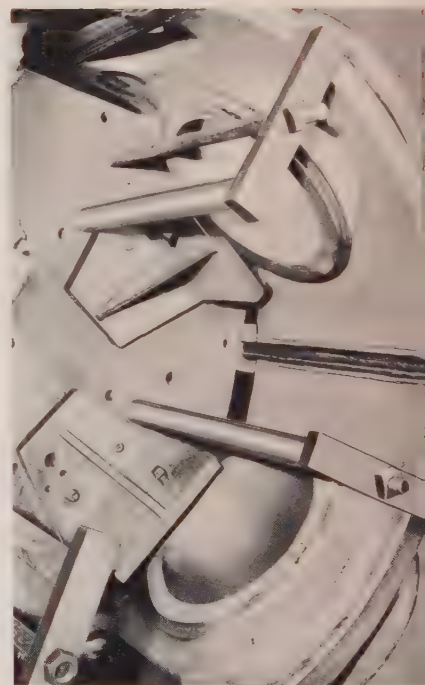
The cylinder attaching flanges are secured to the faceplate of a specially designed welding positioner while 6 interior passes are made on each weld joint. Waster plates are tack welded to each end of the interior weld line to assure proper arc penetration at the beginning and completion of the weld.
